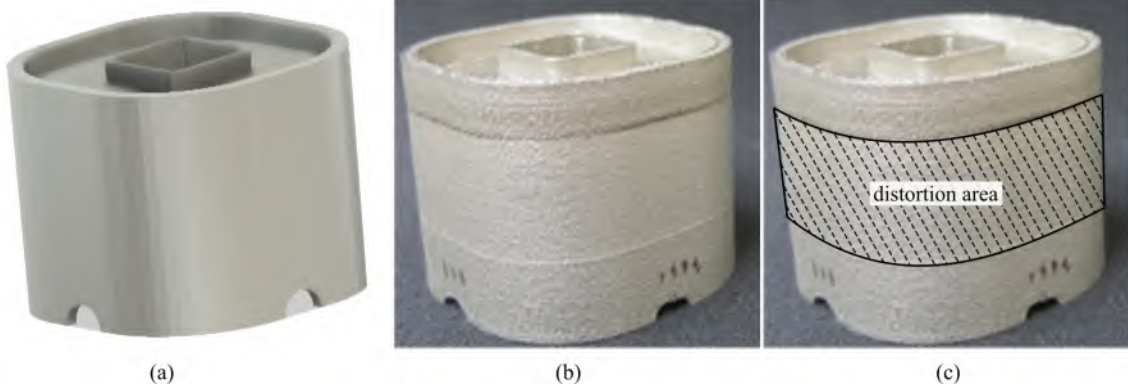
An distorted product of LPBF process with stainless steel 316L: (a) CAD model of the designed product; (b) manufactured product; and (c) the distortion area on the manufactured product.
